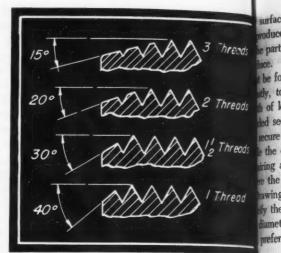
Above—Shoulder clearance in threading affected by the chamfer of the tap or die. above are usually used as noted in the test
